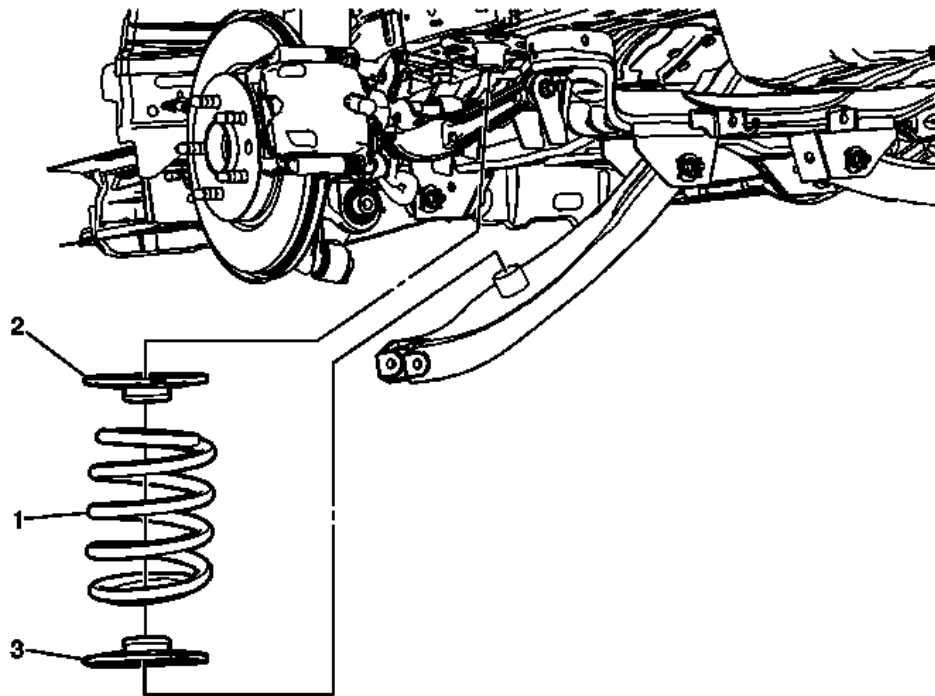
Rear Spring, Insulator & Jounce Bumper
